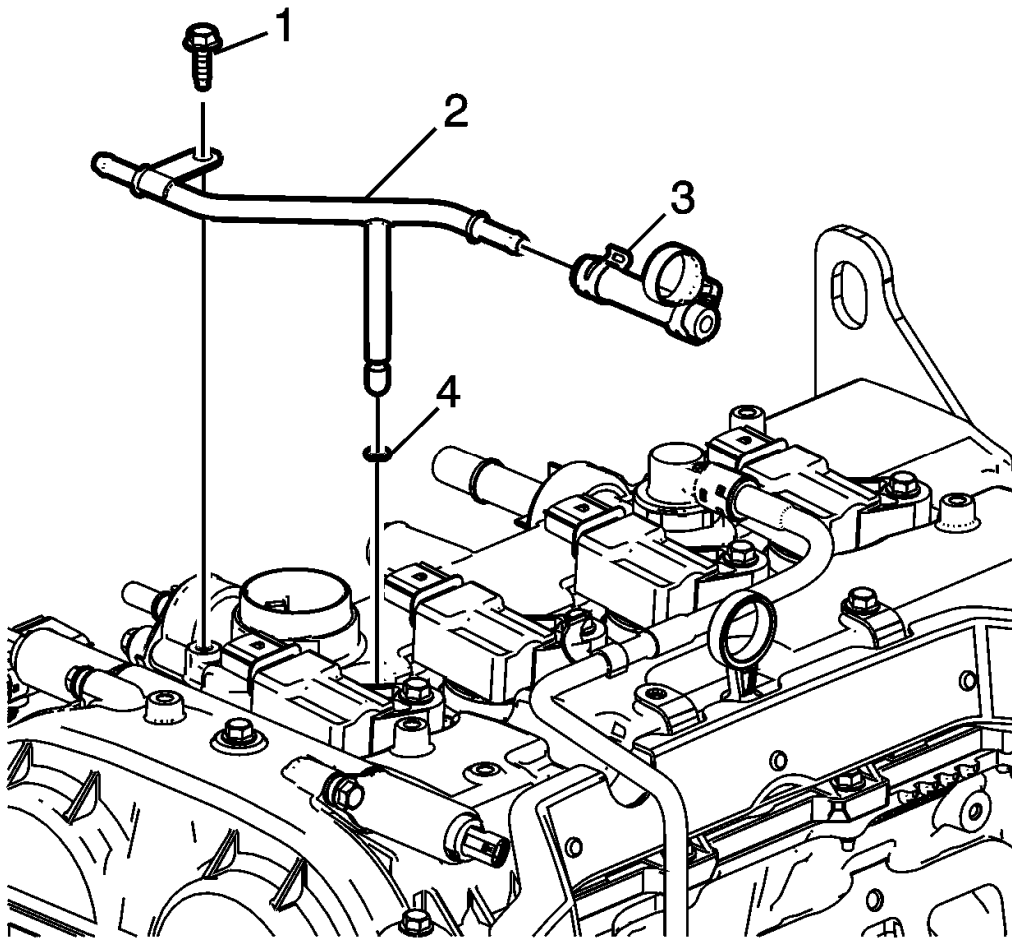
Engine Coolant Air Bleed Pipe Bolt
